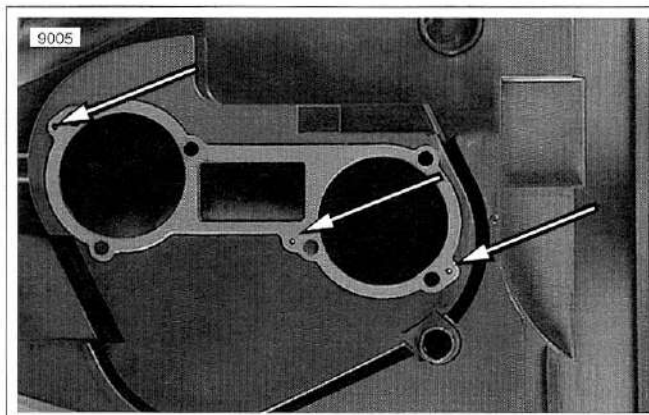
Air Filter Gasket Alignment Pins (3)
